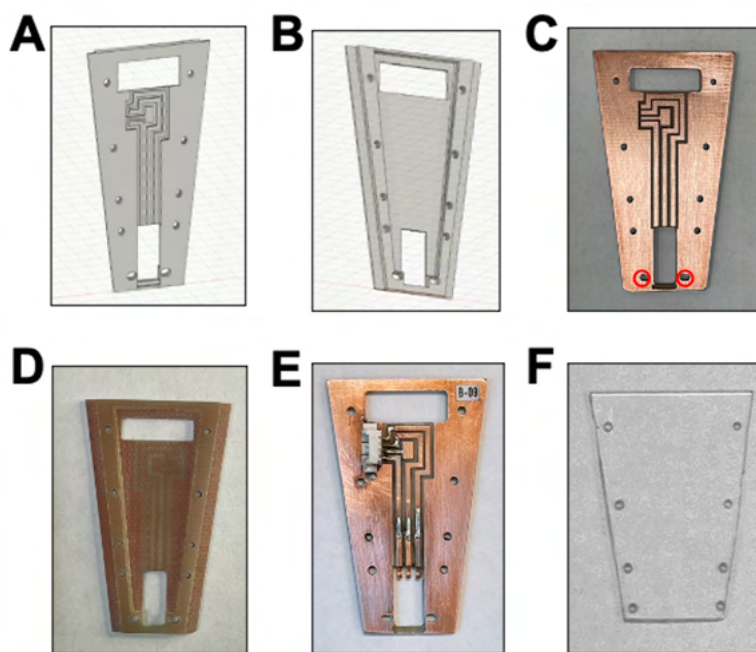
Design and photos of the printed circuit board. (A) and (B) CAD drawing of front and back side of the designed PCB. (C) and (D) Milled structure of the front and back sides of the PCB used in the *in-situ* electrochemical device. (E) 4 pins connector plug, and copper traces are soldered to the PCB. (F) PMMA backplate. The red circles in (C) show the right and left side holes designed to measure the incident flux (I_0).
